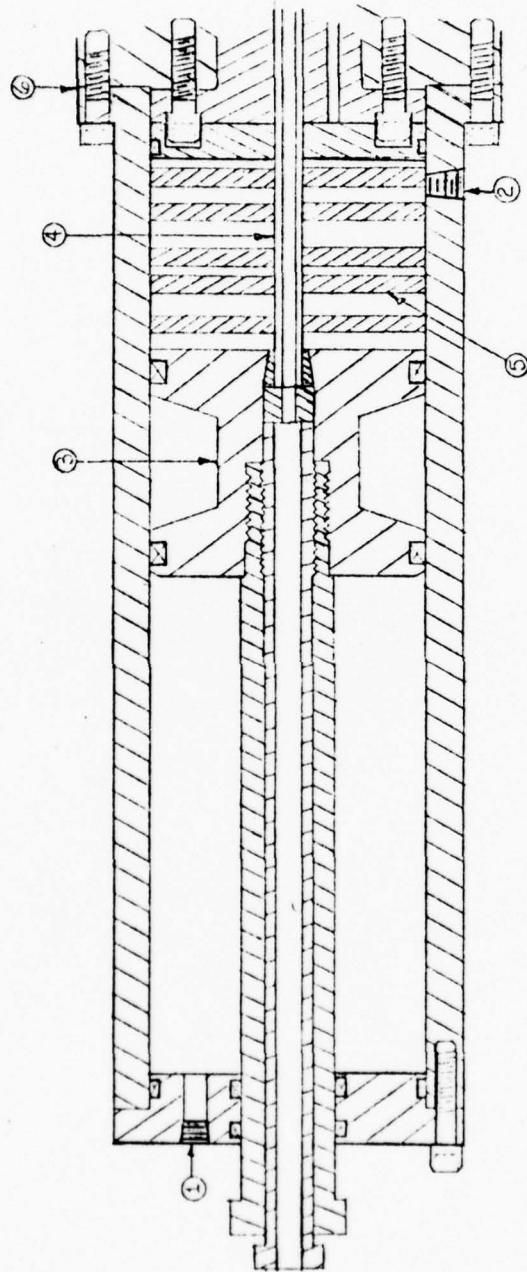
Cross sectional drawing of extrusion piston, die stem and die stem guides.
